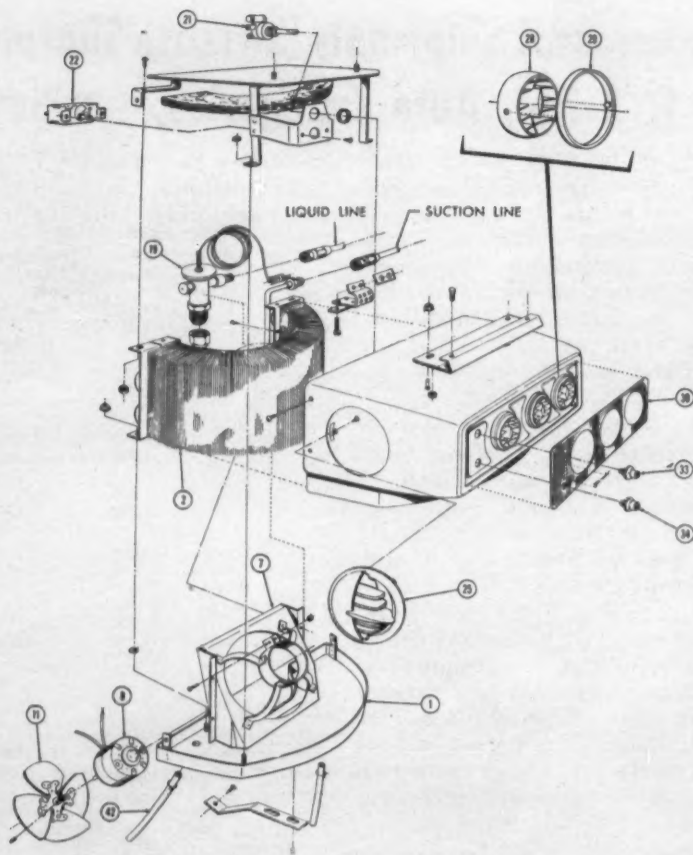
Exploded view of evaporator assembly of 1957 Vornado unit with magnetic clutch. Key: 1—drain pan; 2—evaporator; 7—fan shroud and mounting; 8—fan motor; 11—fan; 19—expansion valve; 21—fan switch; 22—thermostat; 25—side air outlet; 28—front air outlet; 29—retainer ring; 30—cabinet insert; 33—fan switch knob; 34—thermostat knob; 42—drain hose.
